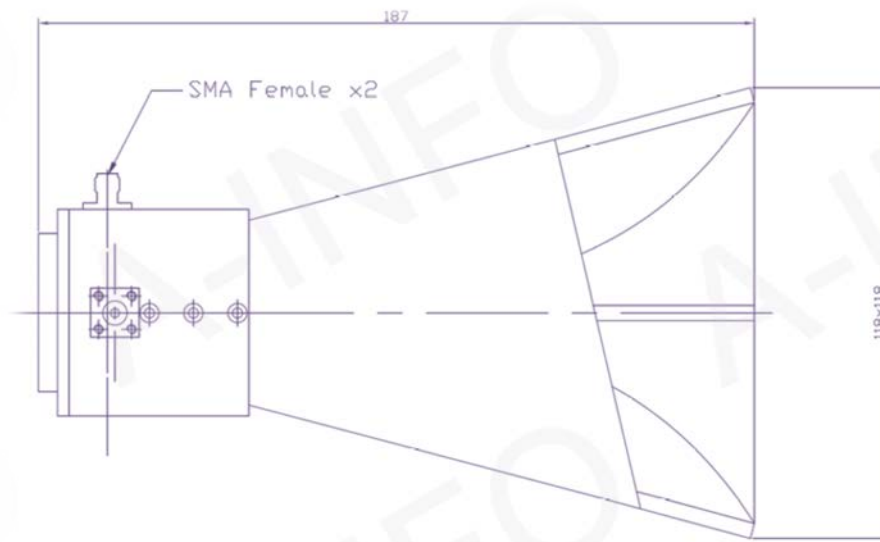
Outline drawing illustrates the dimensions of the horn antenna.
